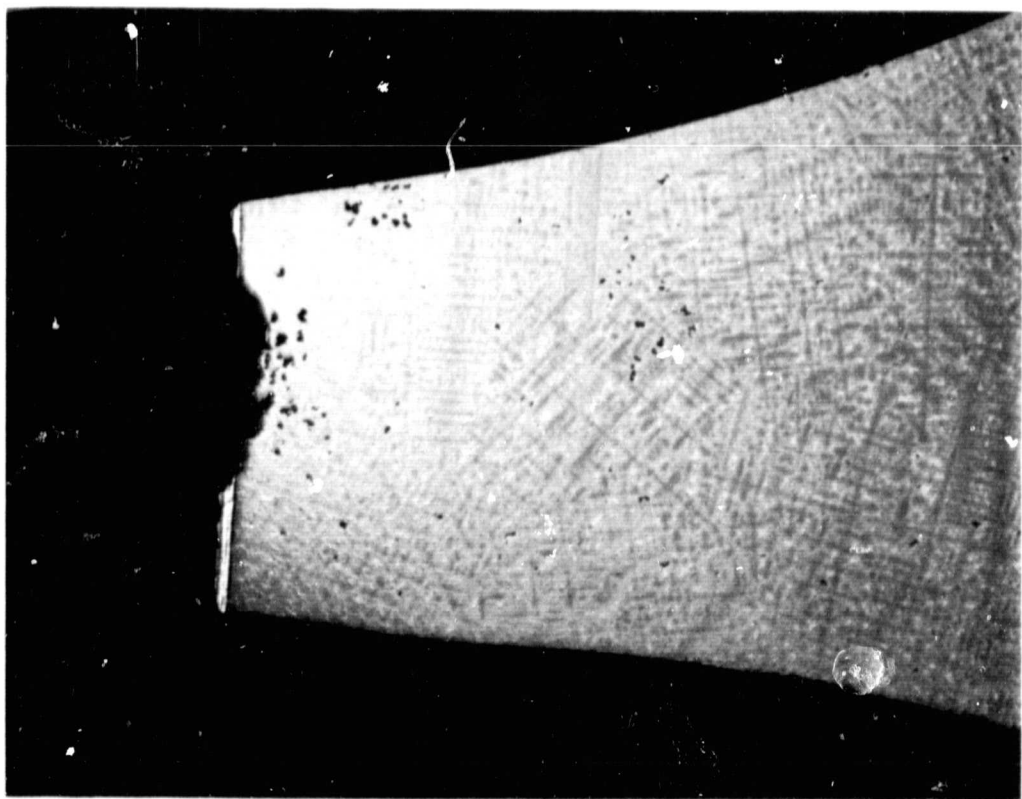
Macrograph of IN100 Test Specimen Showing Excessive Micro Shrinkage at Fracture Face (Mag: 10X) FAL 25016
